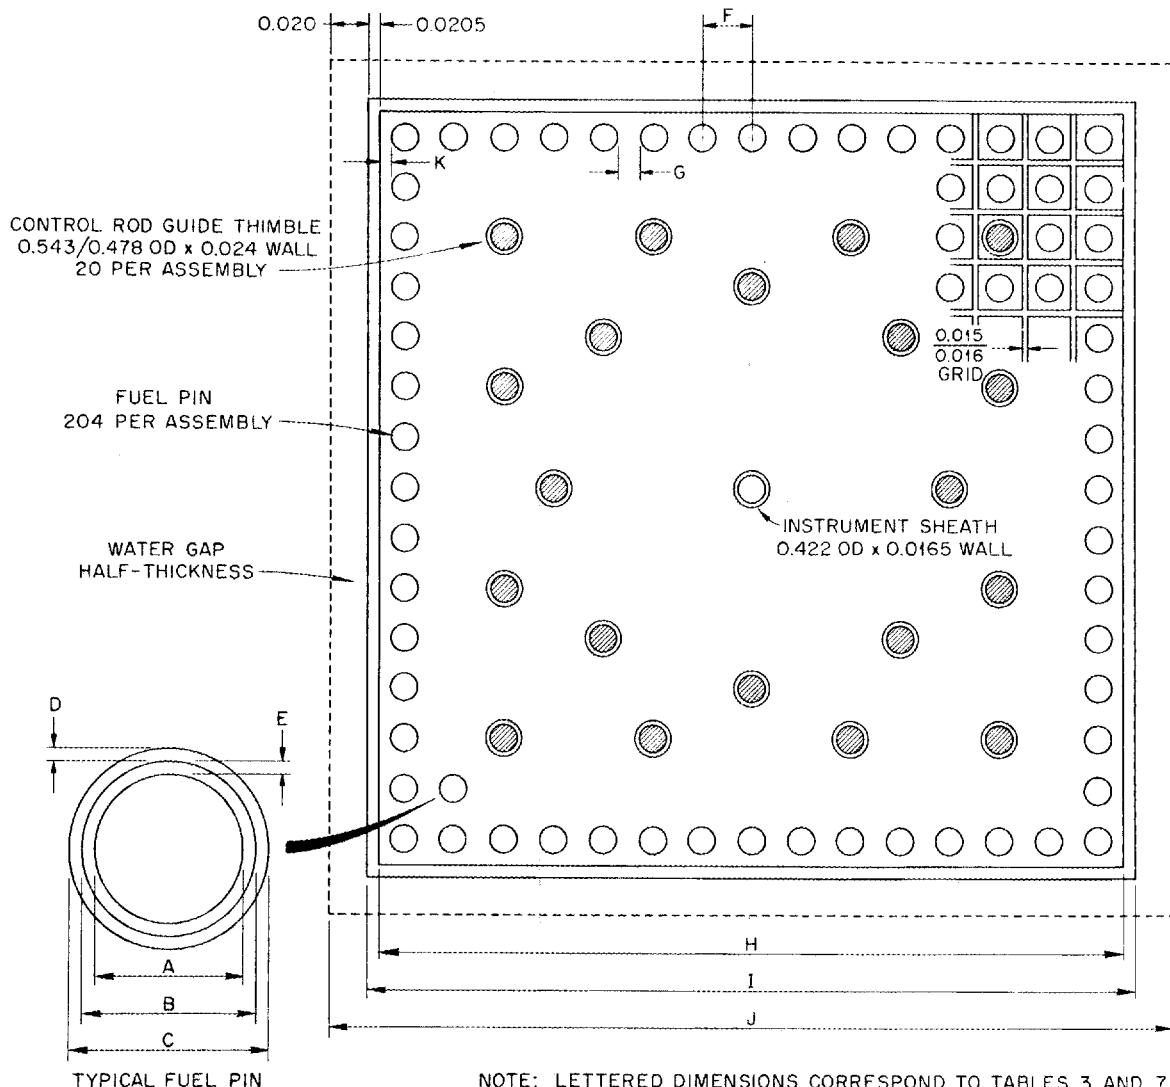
Reference Configuration of the PWR Fuel Assembly
